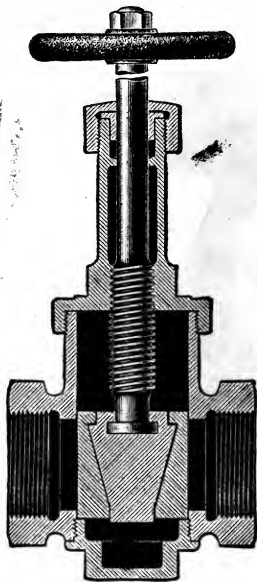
,731.—Star wedge adjustment blow-off valve. *In operation, when closing, the wedge expands the split piston, which is accurately fitted to the cylindrical chamber; in opening, the first movement of valve spindle releases pressure of wedge on the piston, and then wedge raises piston to full opening of the valve.
